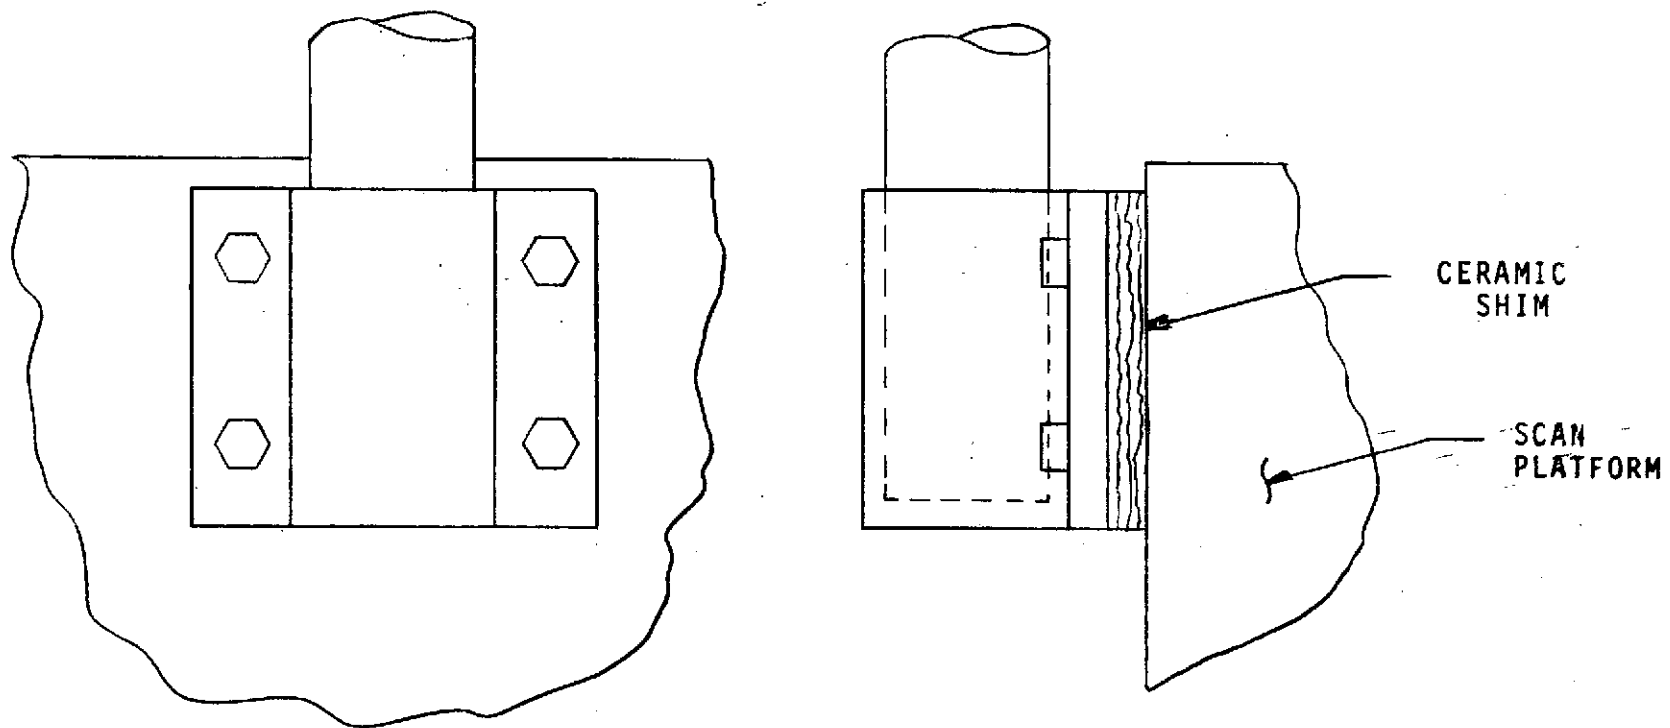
SUPPORT TUBE MOUNTING ASSEMBLY
